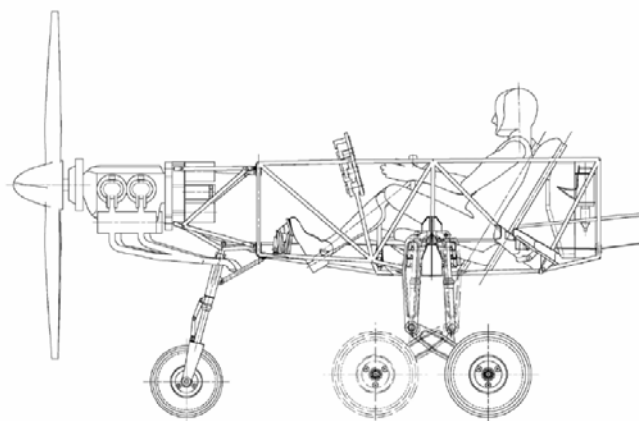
Detail of the assemblage solution of nose-gear or tail-wheel configurations
